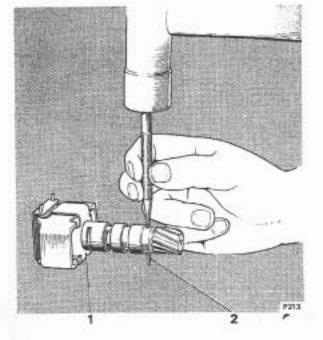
REMOVING GOVERNOR DRIVEN GEAR RETAINING PIN
